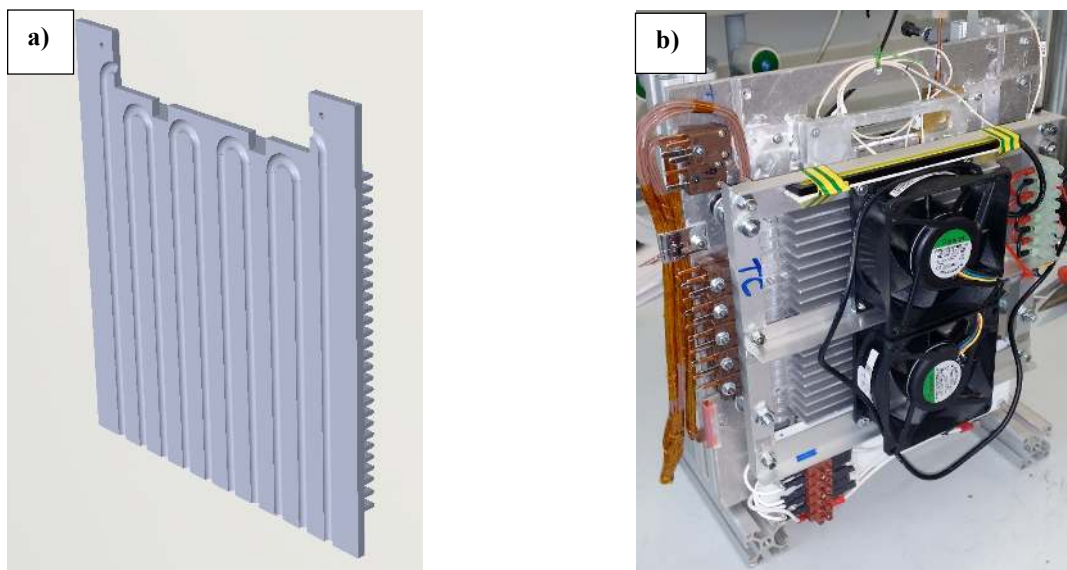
a) CAD view of the milled heat sink; b) The two fans mounted above the heat sink.
